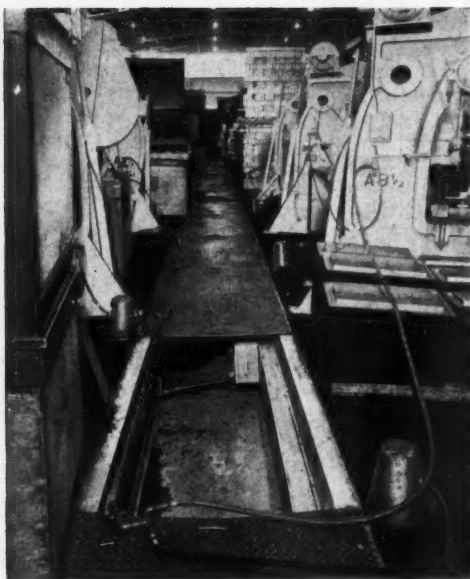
View of the under-floor trench system which houses compressed air lines and plug-in bus-bar points for the electrical power supply
